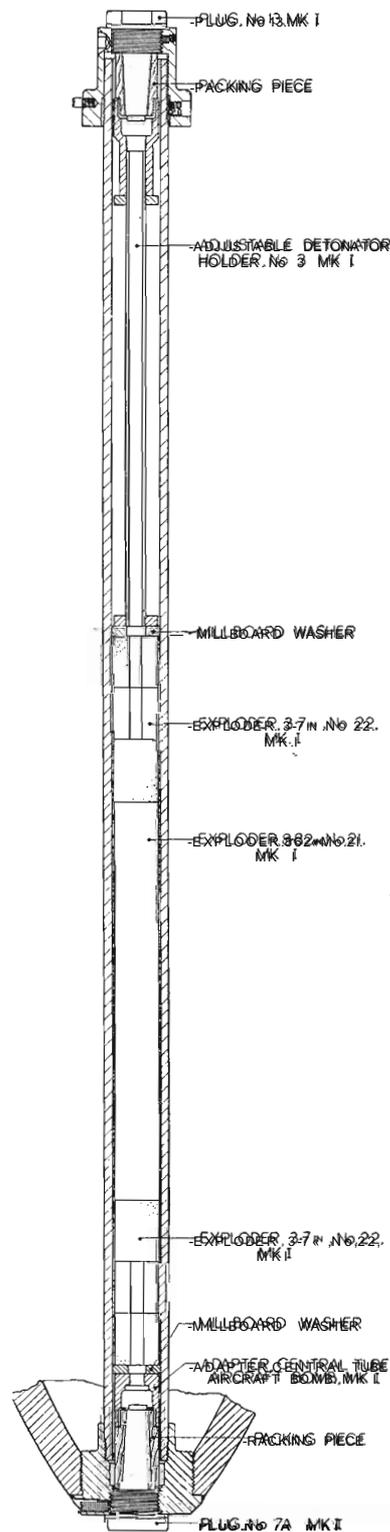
Bomb, H.E., aircraft, G.P., 120 lb Mk. I or II, exploded to Scheme
